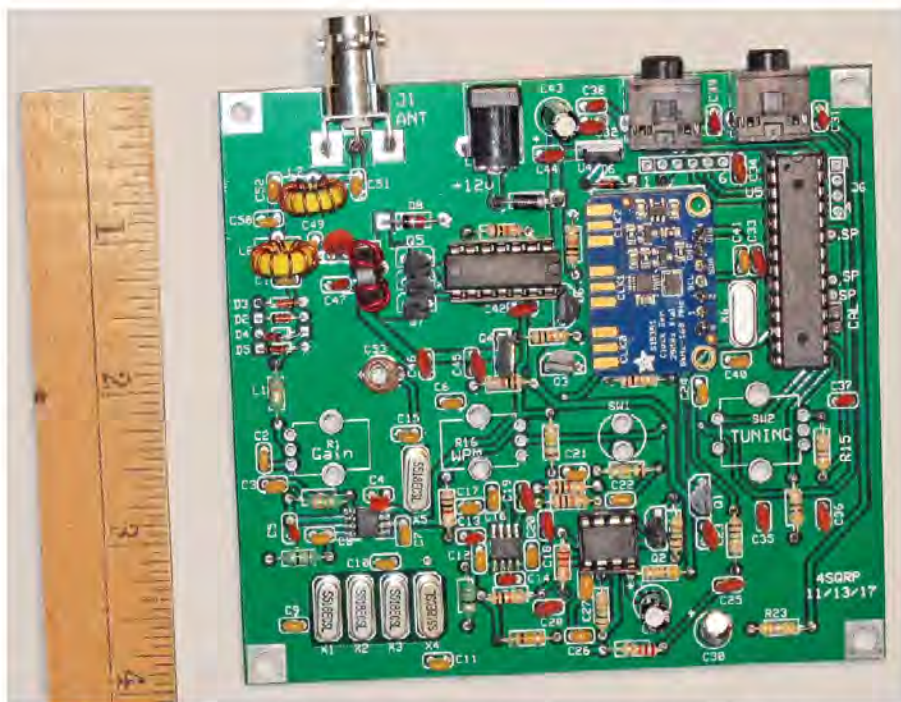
The completed PC board, without the four top-panel controls that will be mounted later.
